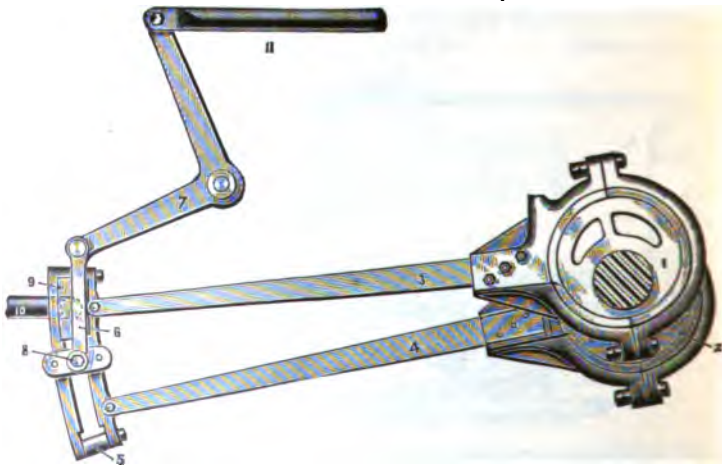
Diagram of the Link Motion and Eccentric Gear of a Steam Engine. The parts shown are: (1) backward eccentric; (2) forward eccentric; (3-4) eccentric rods; (5) slotted shifting link; (6) link hanger; (7) reversing arm; (8) link saddle pin; (9) link block; (10) valve stem; (11) reach rod. The position shown in the cut indicates that the backward eccentric is in gear which gives a reverse motion to the engine.
